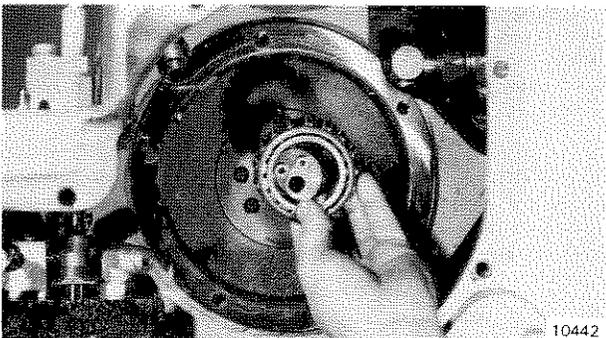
REMOVAL OF THE BRAKE, CLUTCHES AND SHAFT (Page 1 of 3)
